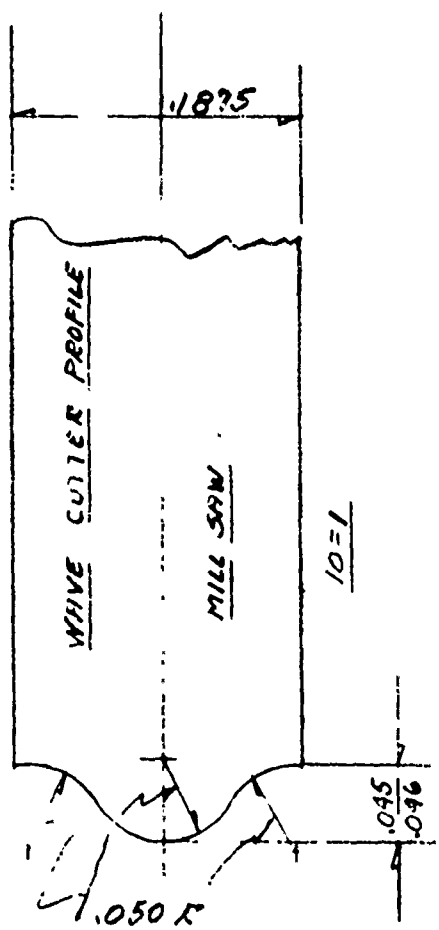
ENGINEERING DRAWING OF MILL CUTTER PROFILE
